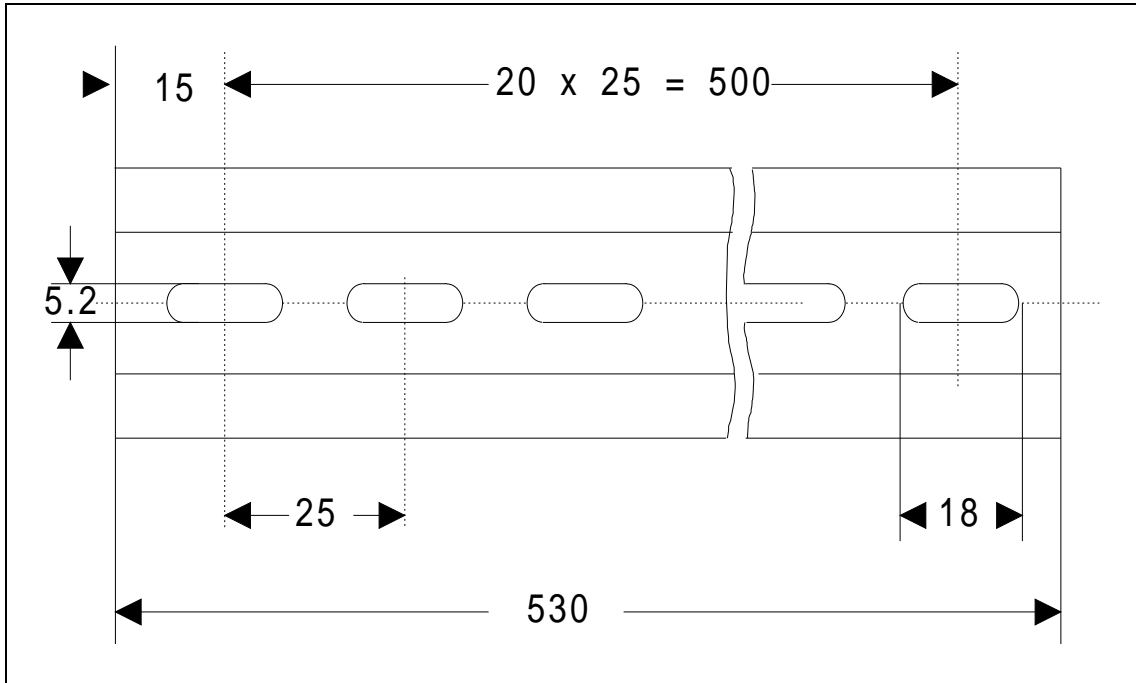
Dimension Drawing of the 530 mm Standard Sectional Rail
